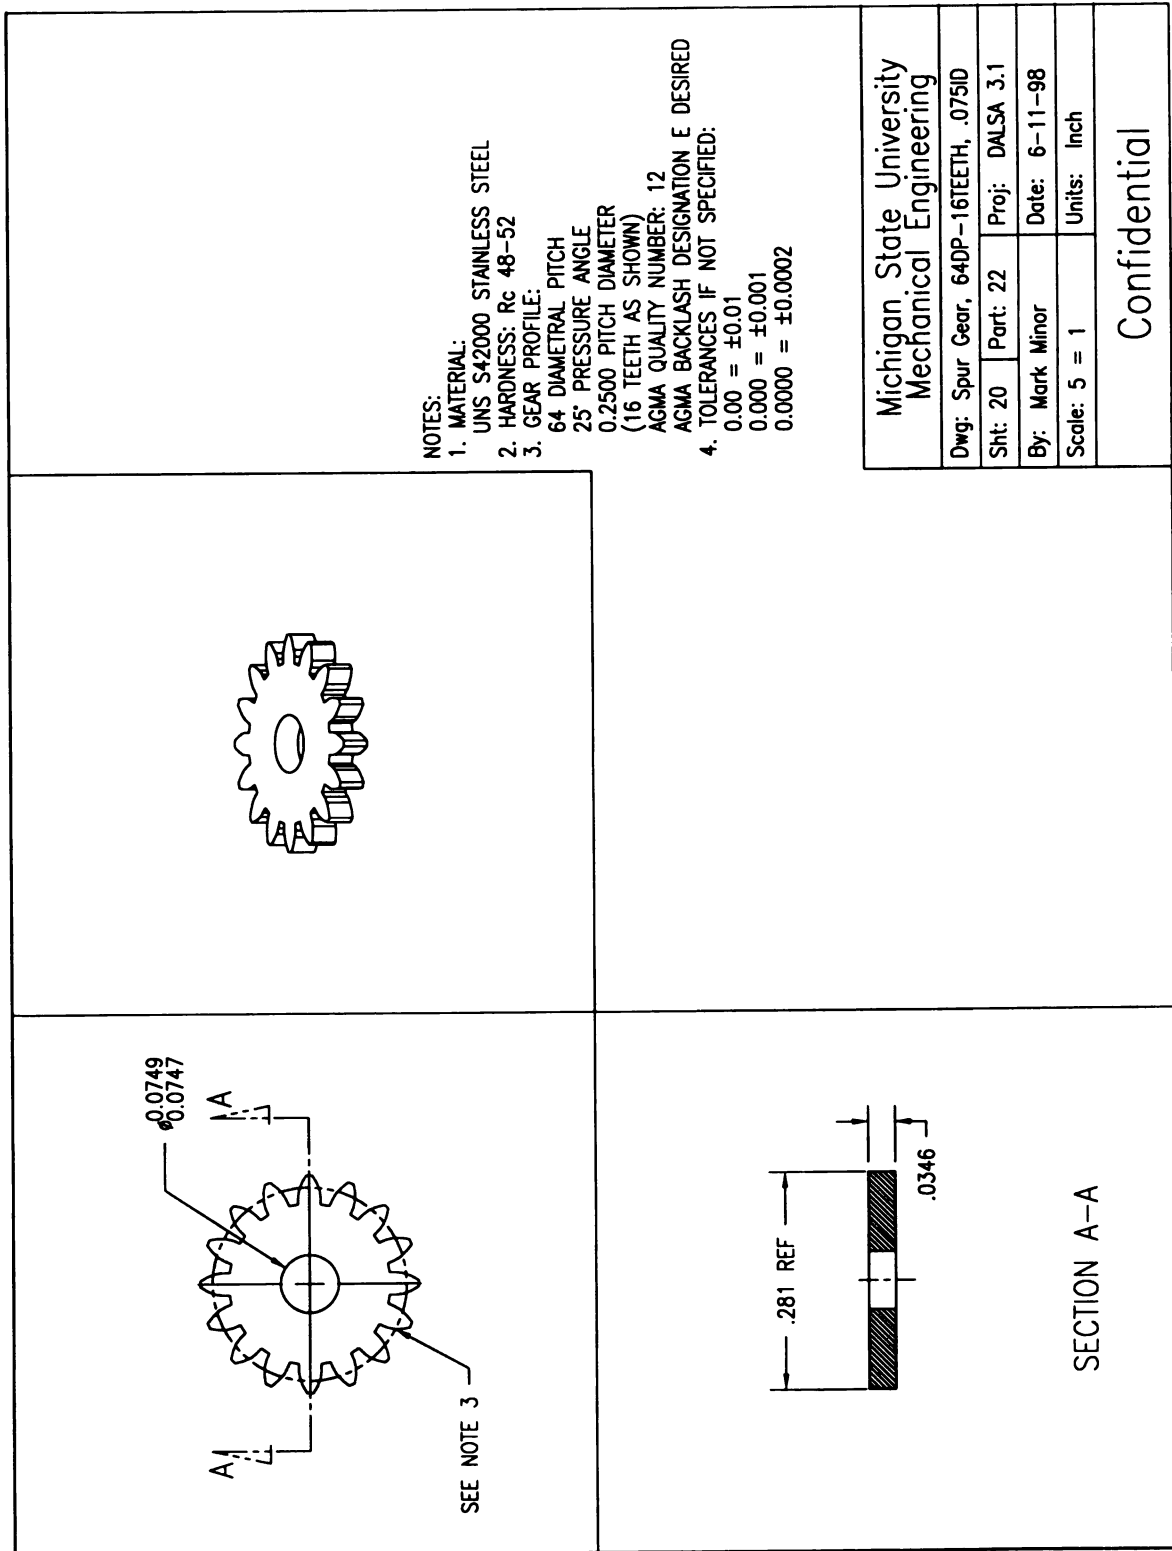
DALSA Component: Spur Gear 64DP, 16 Tooth, .075ID (sheet 20).
